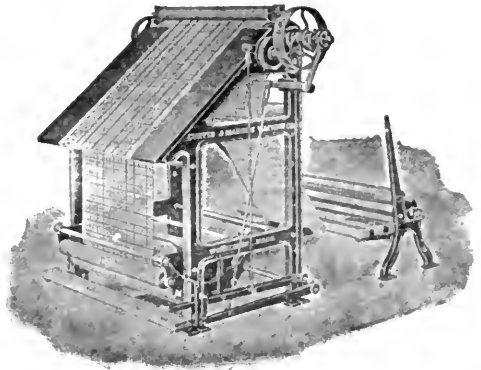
Cloth Inspecting Machine with Reverse-motion and Rolling-head.
